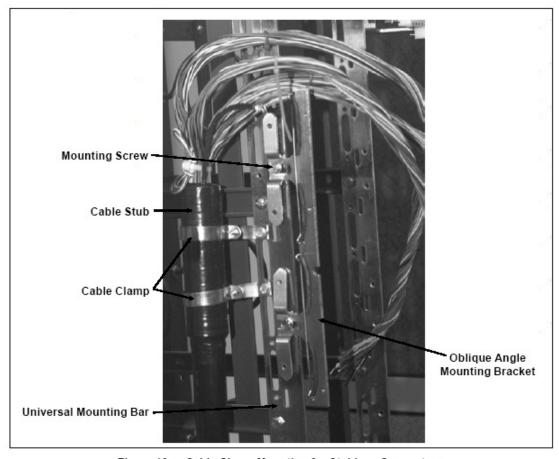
Cable Clamp Mounting for Stubless Connectors
